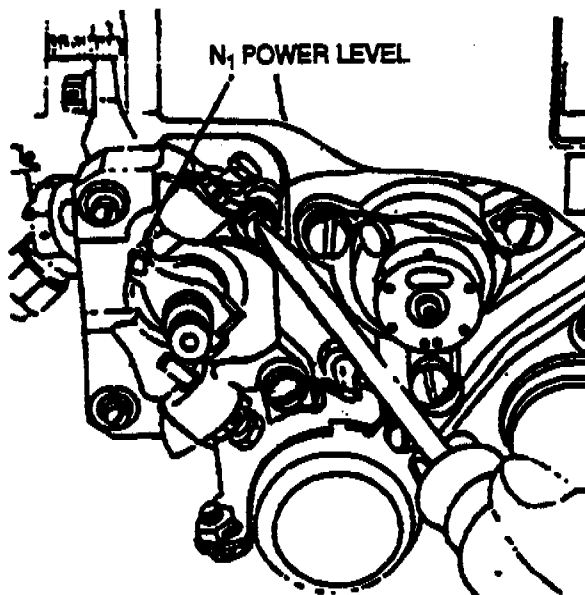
Removing Screw and Washer Prior to Installing Quadrant Spacer.
